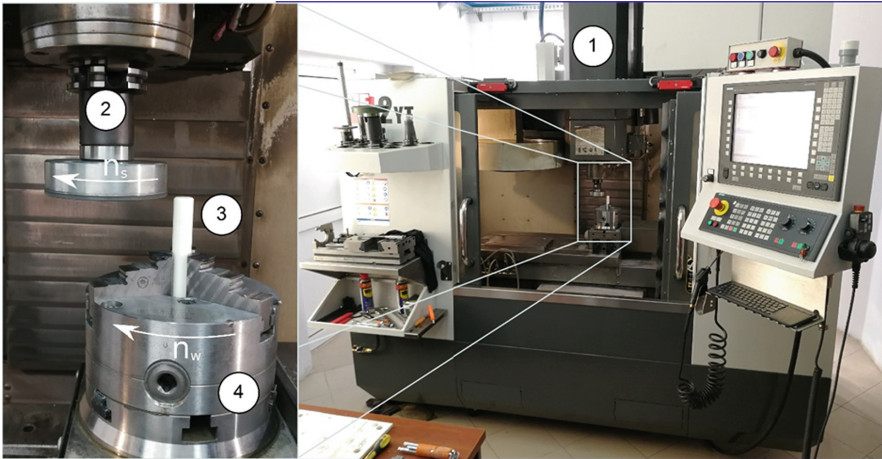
Configuration of the test stand: 1 – machine tool, 2 – diamond grinding wheel, 3 – workpiece, 4 – rotary table (4th axis).
